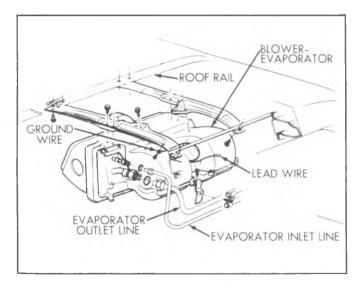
B-48--Blower-Evaporator (C-K Overhead System)
